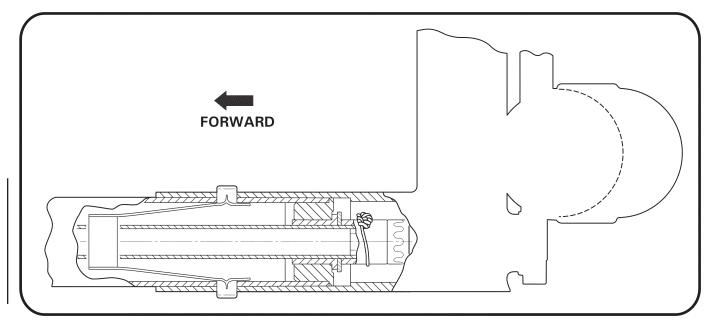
A795-7 tube locking pin installed (completed upgrade; view looking down)
